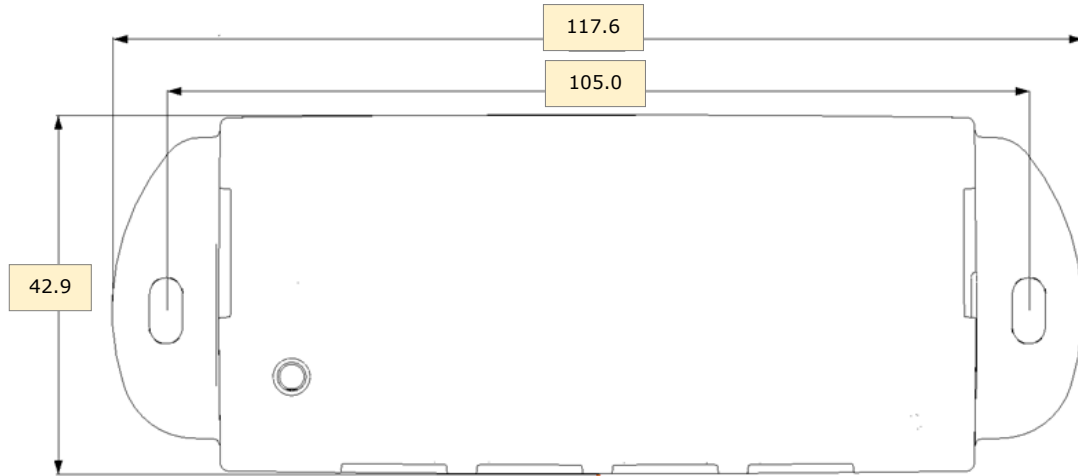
LDSBus HVT-Junction Dimension – Top View
